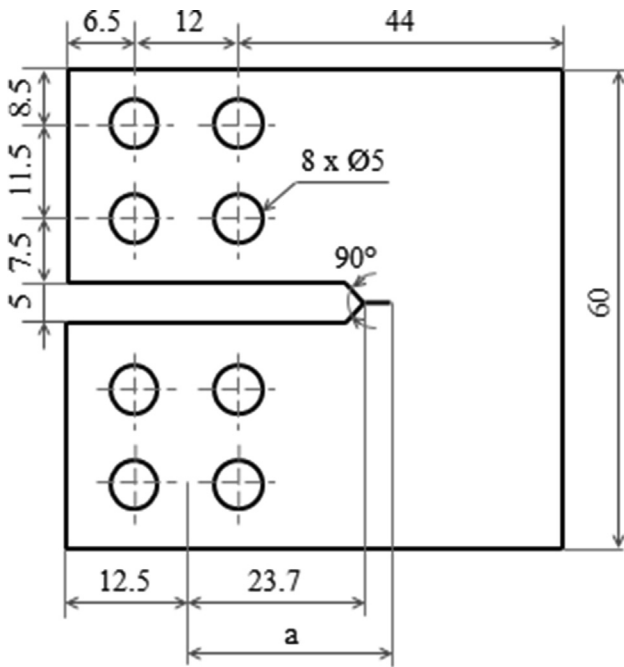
Dimensions of the CTST specimen (thickness is 25 mm, [17,18]).
